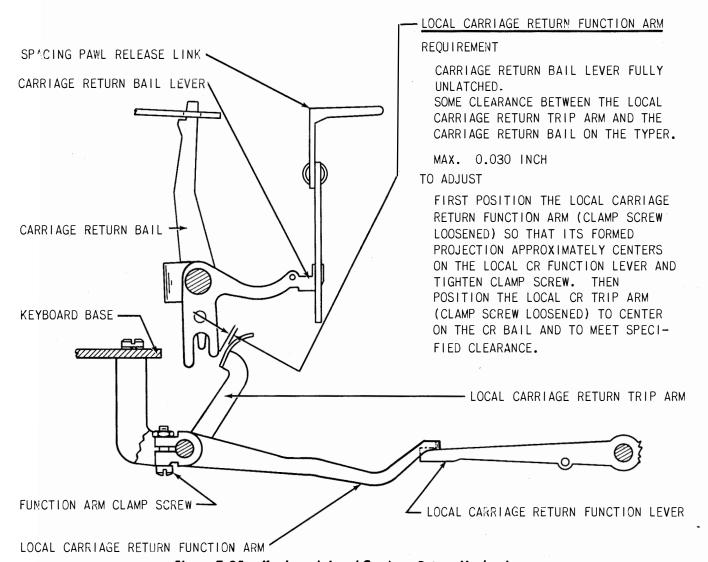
Keyboard, Local Carriage Return Mechanism
